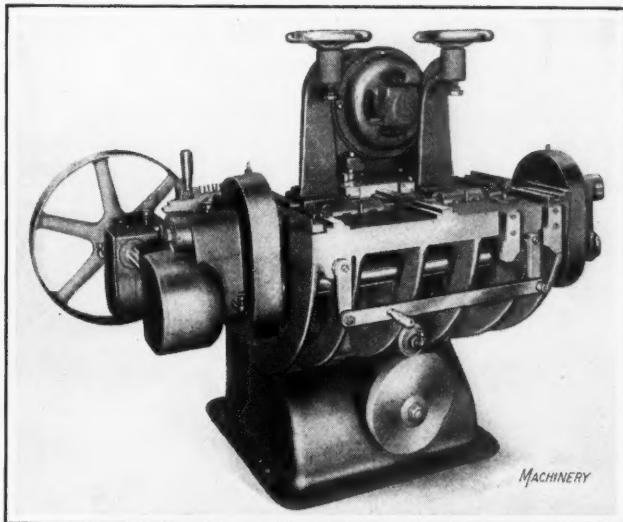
Special Type of Straddle-milling Machine built by the Newton Machine Tool Works, Inc.
